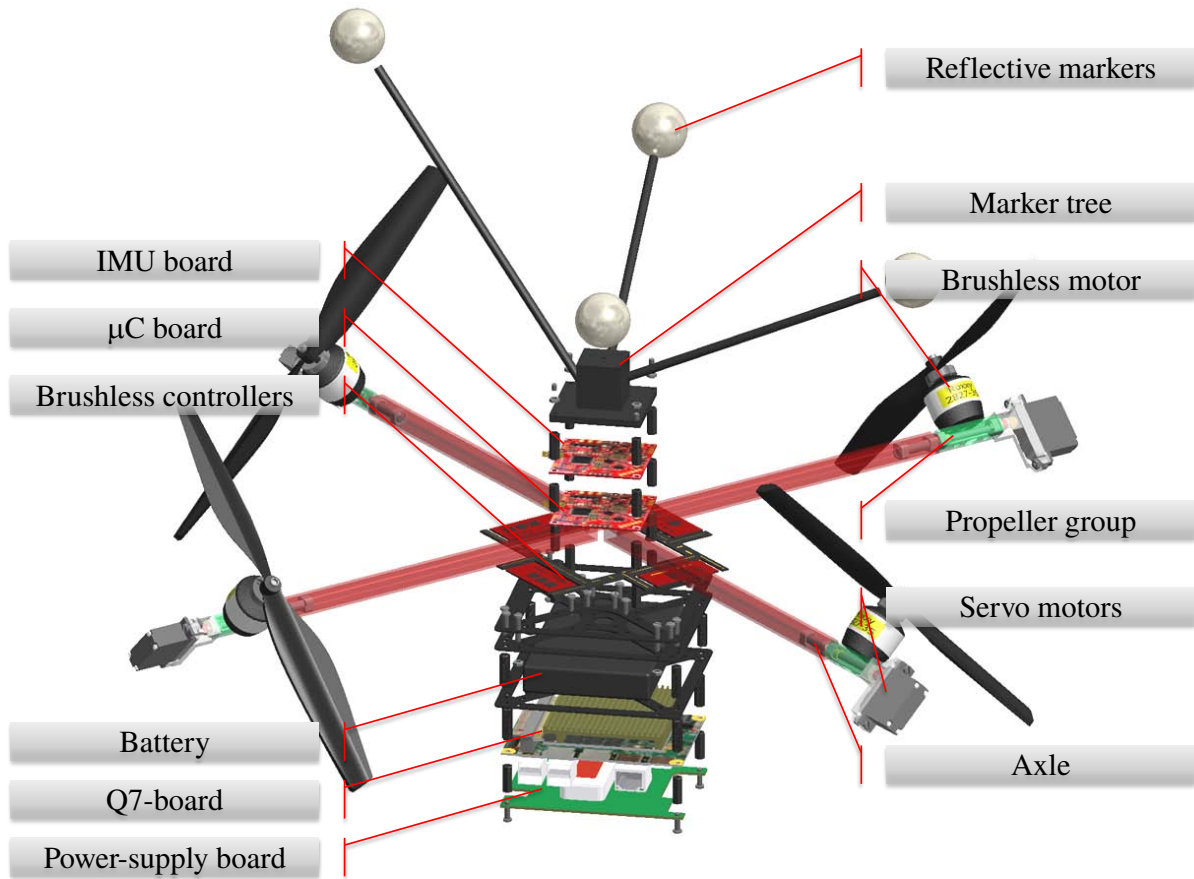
Exploded view of the various components of the holocopter. All the important parts are properly labeled
